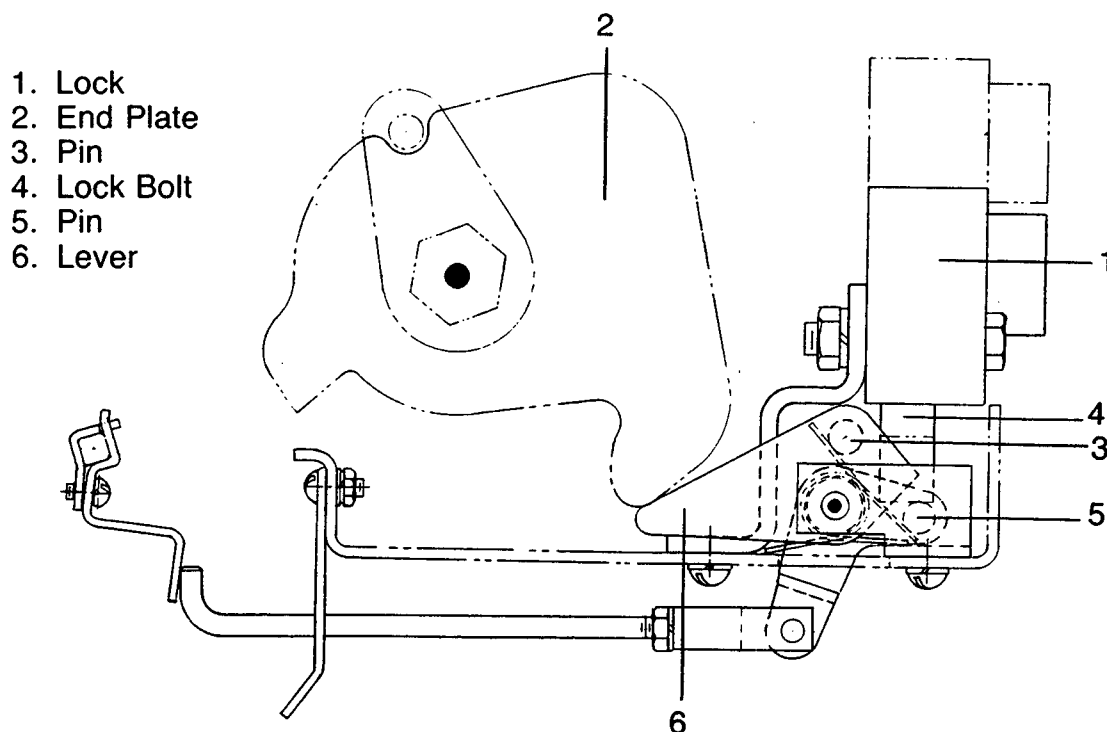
KEY INTERLOCK—STATIONARY BREAKERS
